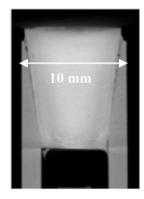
XCT Image of Scarf Joint Test Specimen
